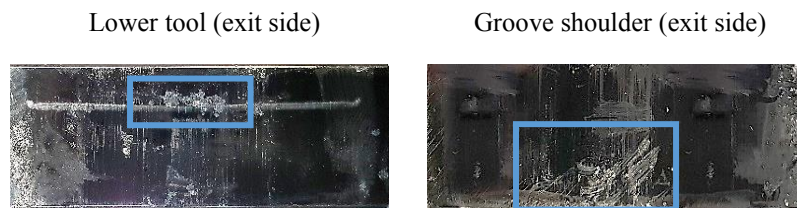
Surface structure of the lower tool and the groove shoulder after 1990 strokes with the DP 980 sheet material and a 2mm bead penetration.
